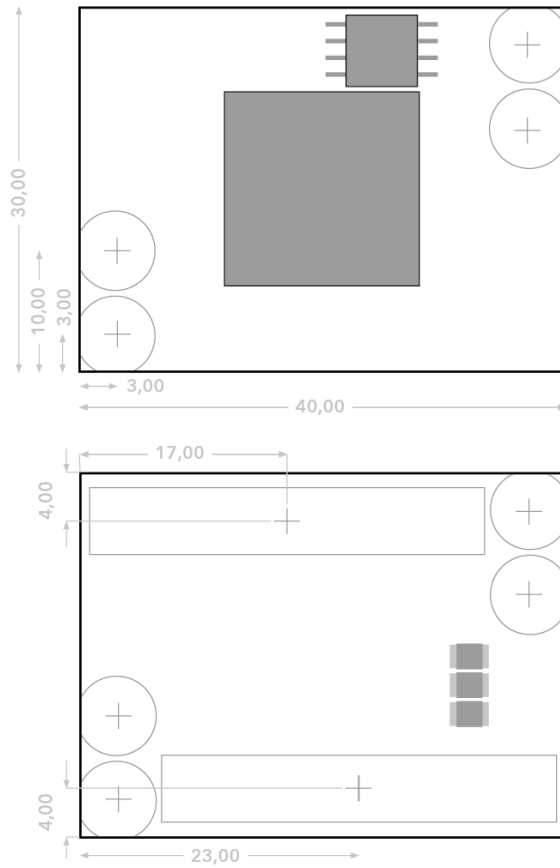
Dimensions of the module and placement of the B2B connectors and mounting holes. All dimensions are in mm. Mating height with a standard connector is 8 mm.
